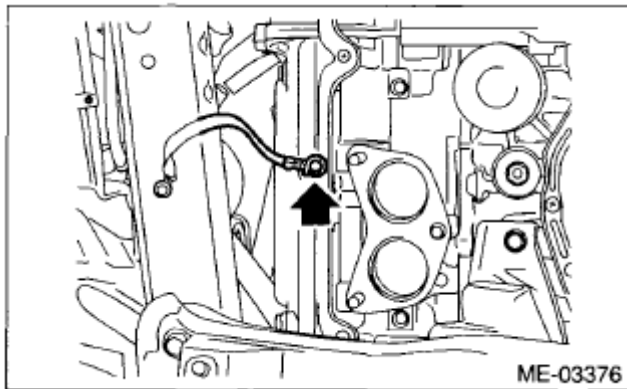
Locating Ground Cable With Bolt (1 Of 2)
